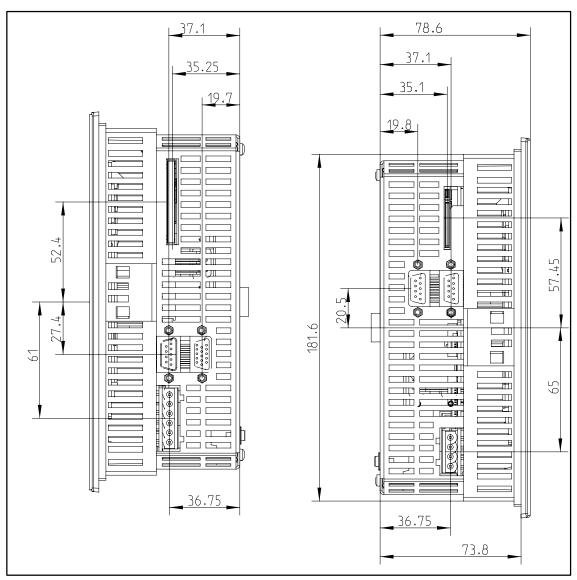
Dimension Drawings for the C7-635 Touch (Measurements in mm)
